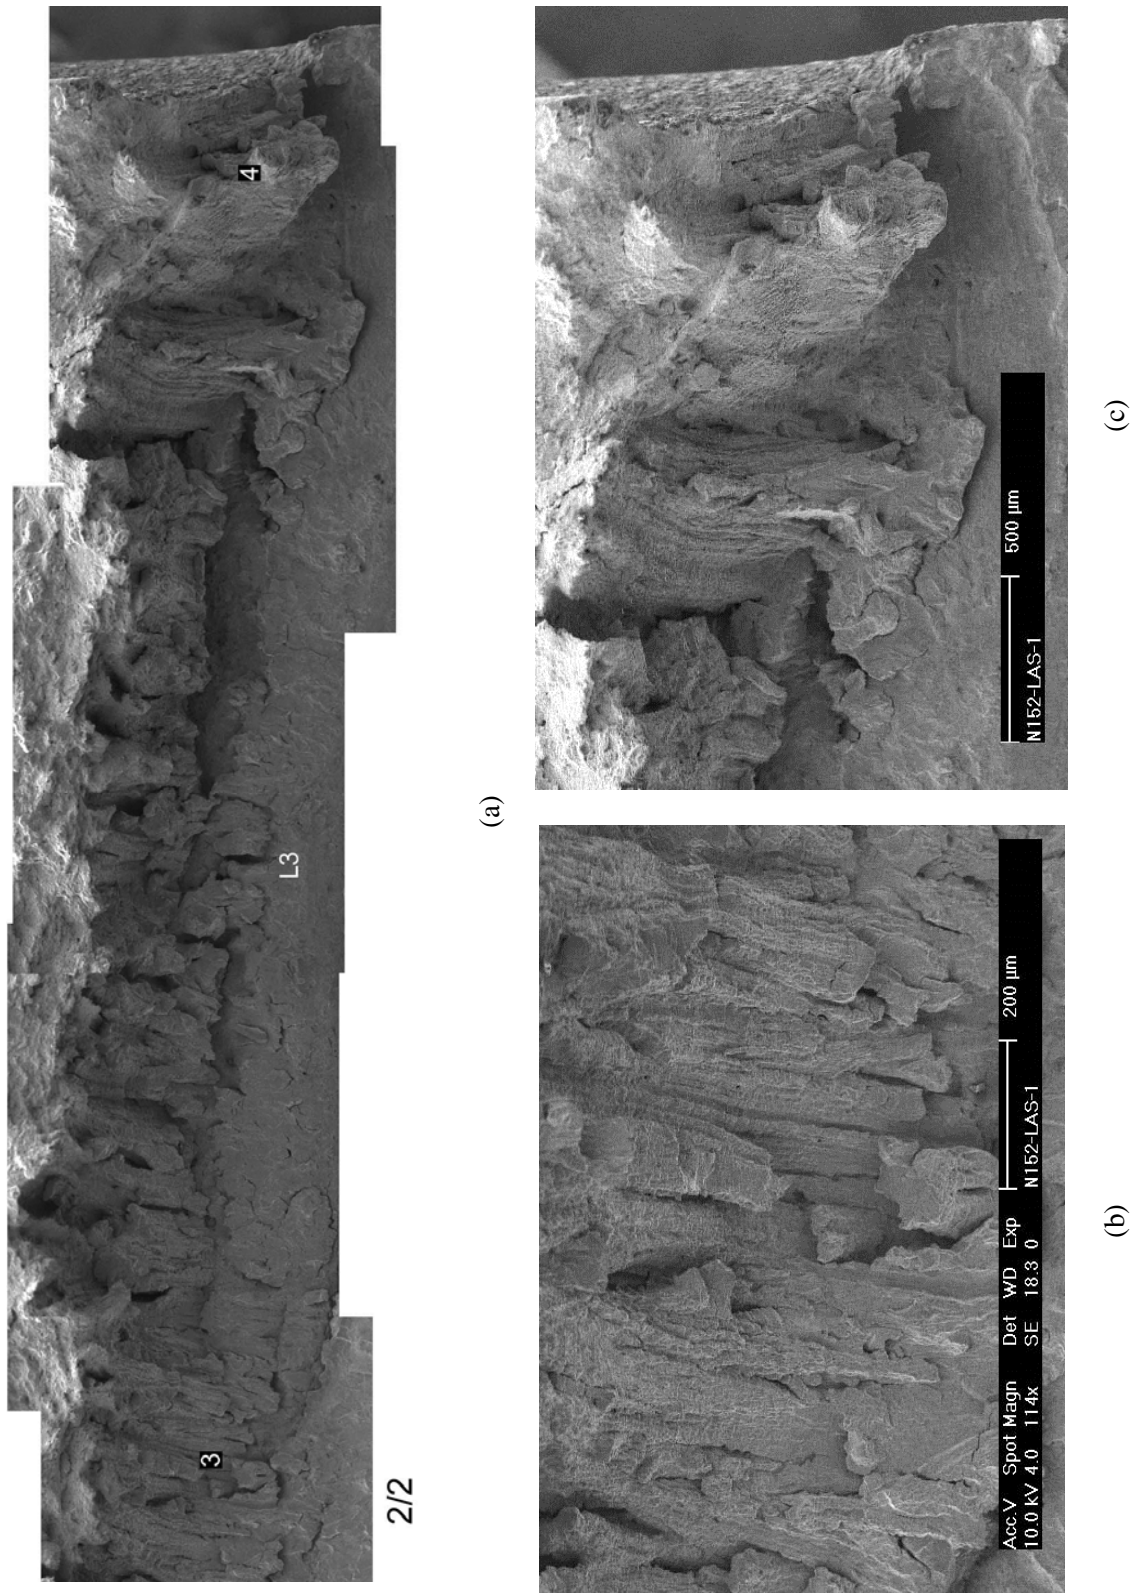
Fracture surface of N152-LAS-1, region IG-2 (Fig.9): (a) second half of the fracture surface, (b) detail at location 3, and (c) detail at location 4. Crack advance is from bottom to top.
